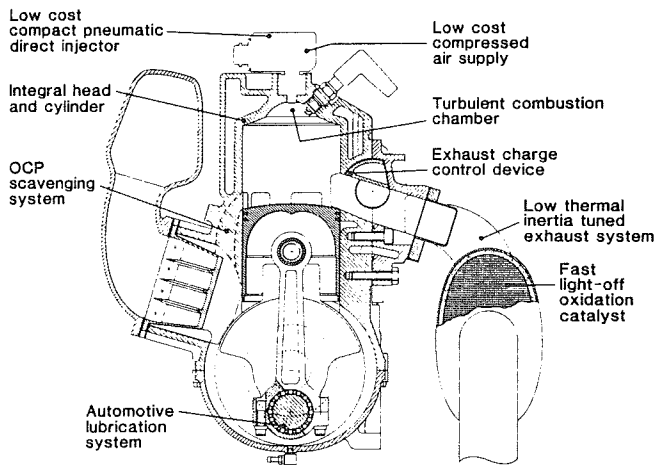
Cross-sectional drawing of Orbital Combustion Process two-stroke cycle gasoline engine
